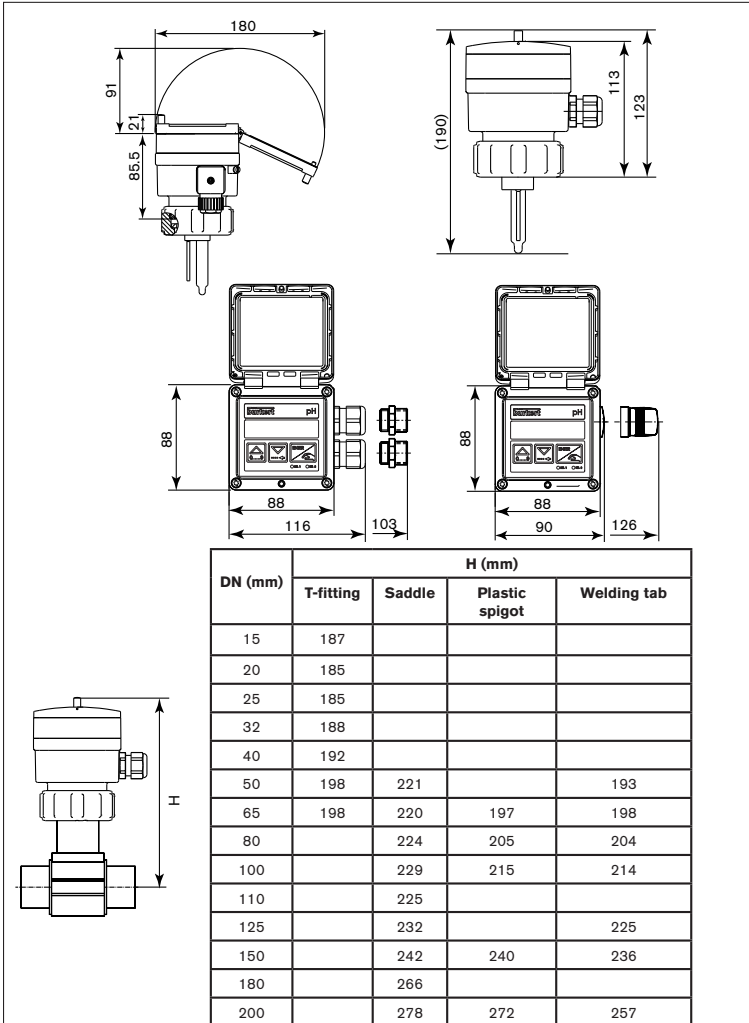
Dimensions pH transmitter 8205 compact version
